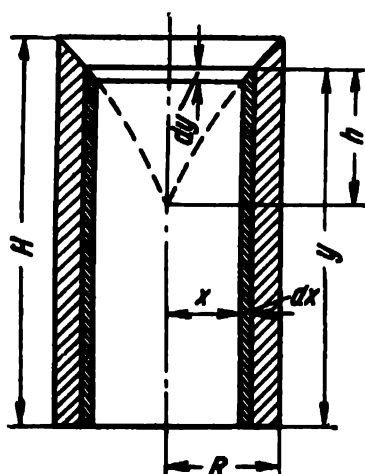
Calculation of the mould and the location of a shrinkage cavity in a cylindrical casting cooled only from the sides (Nekhendzi):
